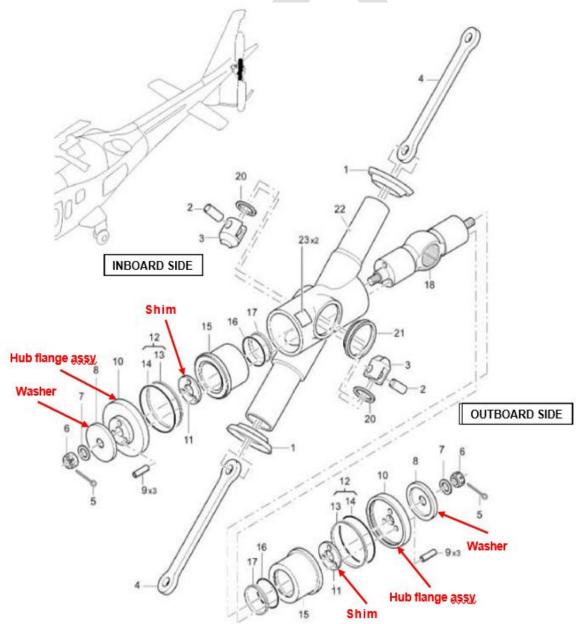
Exploded view drawing of the tail rotor hub assembly, with indication of the relevant parts for the investigation.
